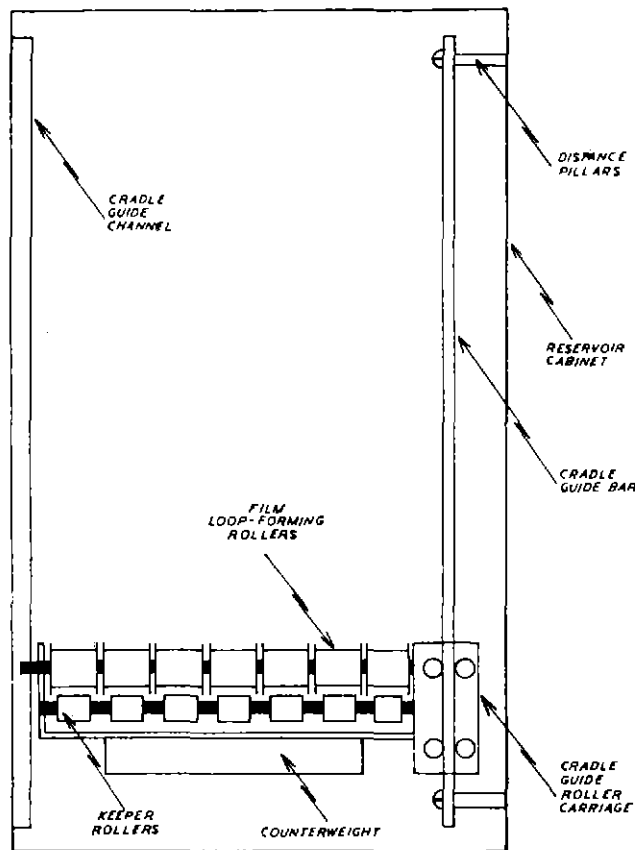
Improved mounting of lower film roller cradle in the reservoir compartment
